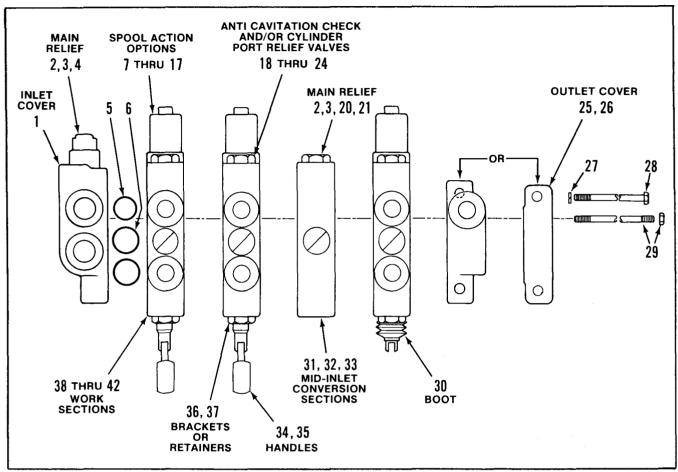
Model V42 Directional Control Valve, Typical Main Assembly.
